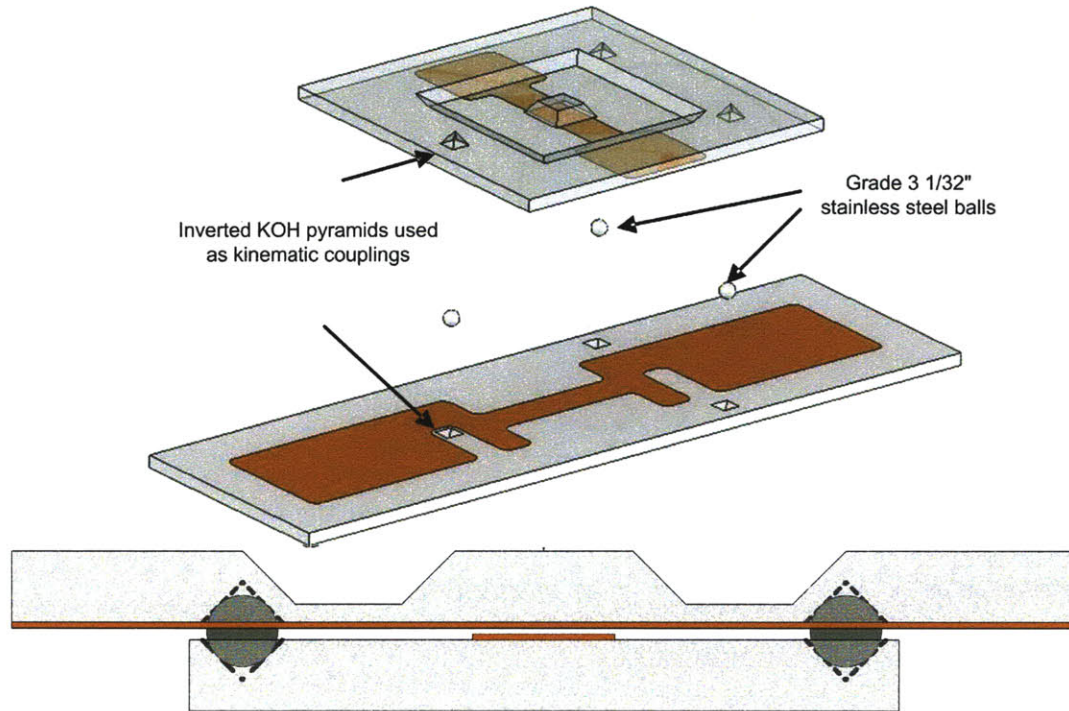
Top: Exploded view of the kinematic coupling two-coupon assembly. Bottom: A not-to-scale representative cross section of the assembly.
